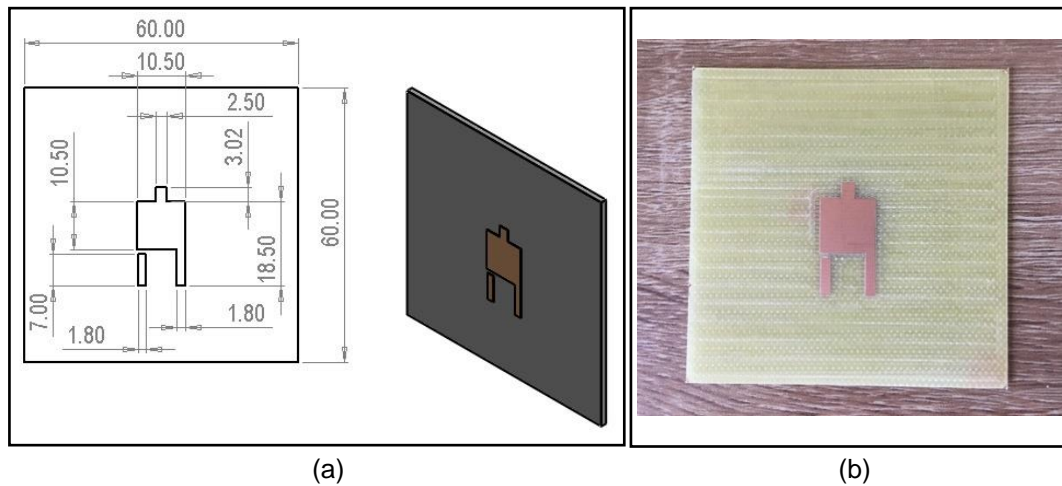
The PCB design for solar cell housing: (a) CAD drawing and (b) PCB photograph. (Dimensions in the CAD drawing are in mm).
